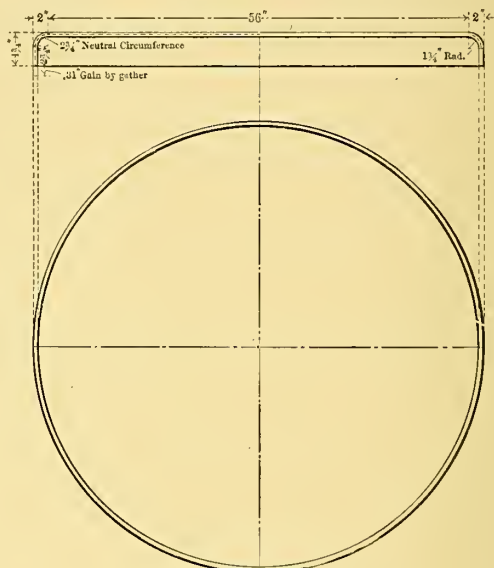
PLAN AND ELEVATION OF HEAD.
